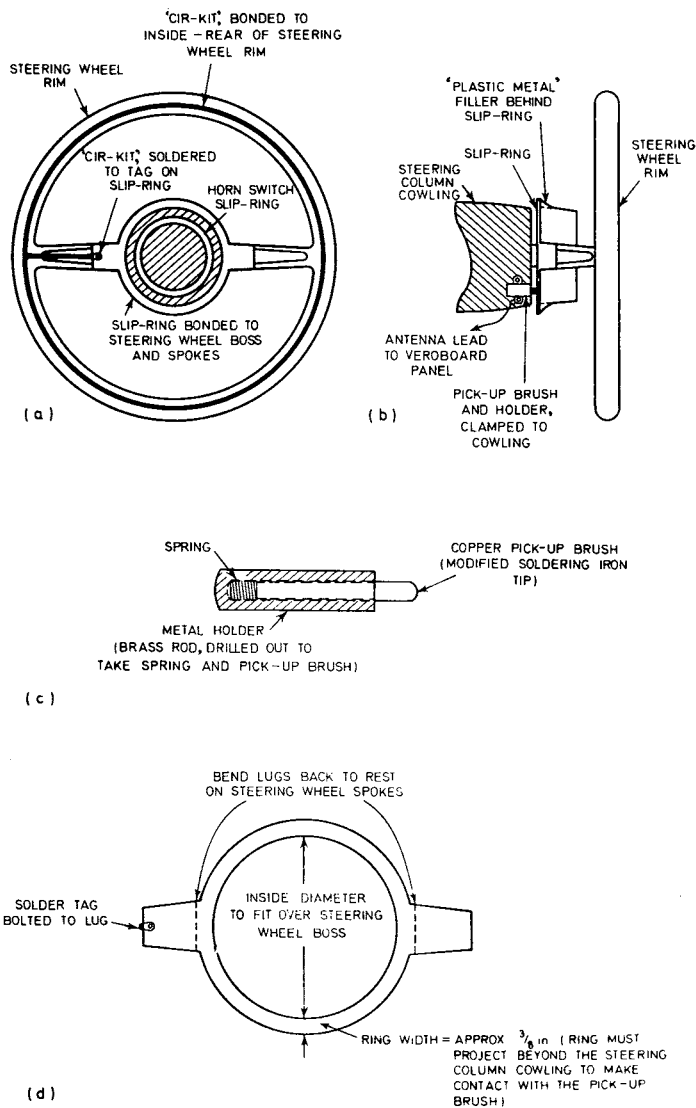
Rear view of steering wheel assembly. ('Cir-Kit' antenna is shown at rear of rim for clarity, but in practice must be positioned further inside the rim)
